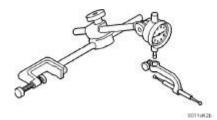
Dial Indicator C-3339A Courtesy of CHRYSLER LLC
